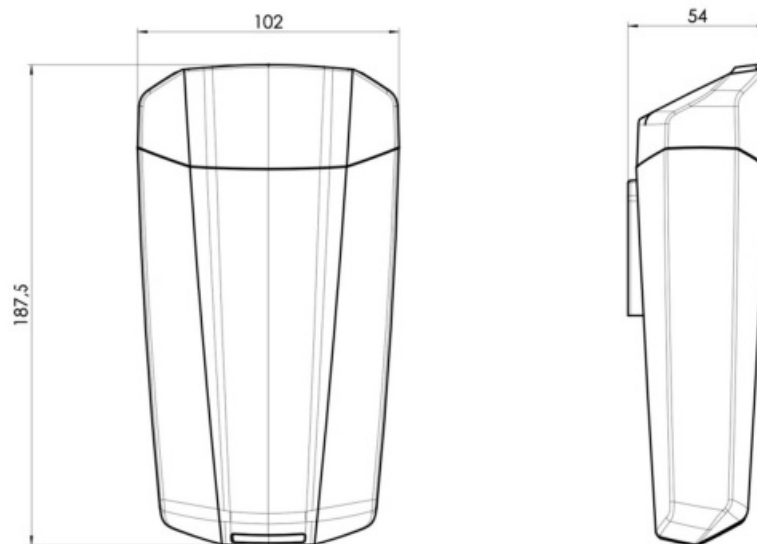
Dimension of the CorivaSat (IP20 Version)
